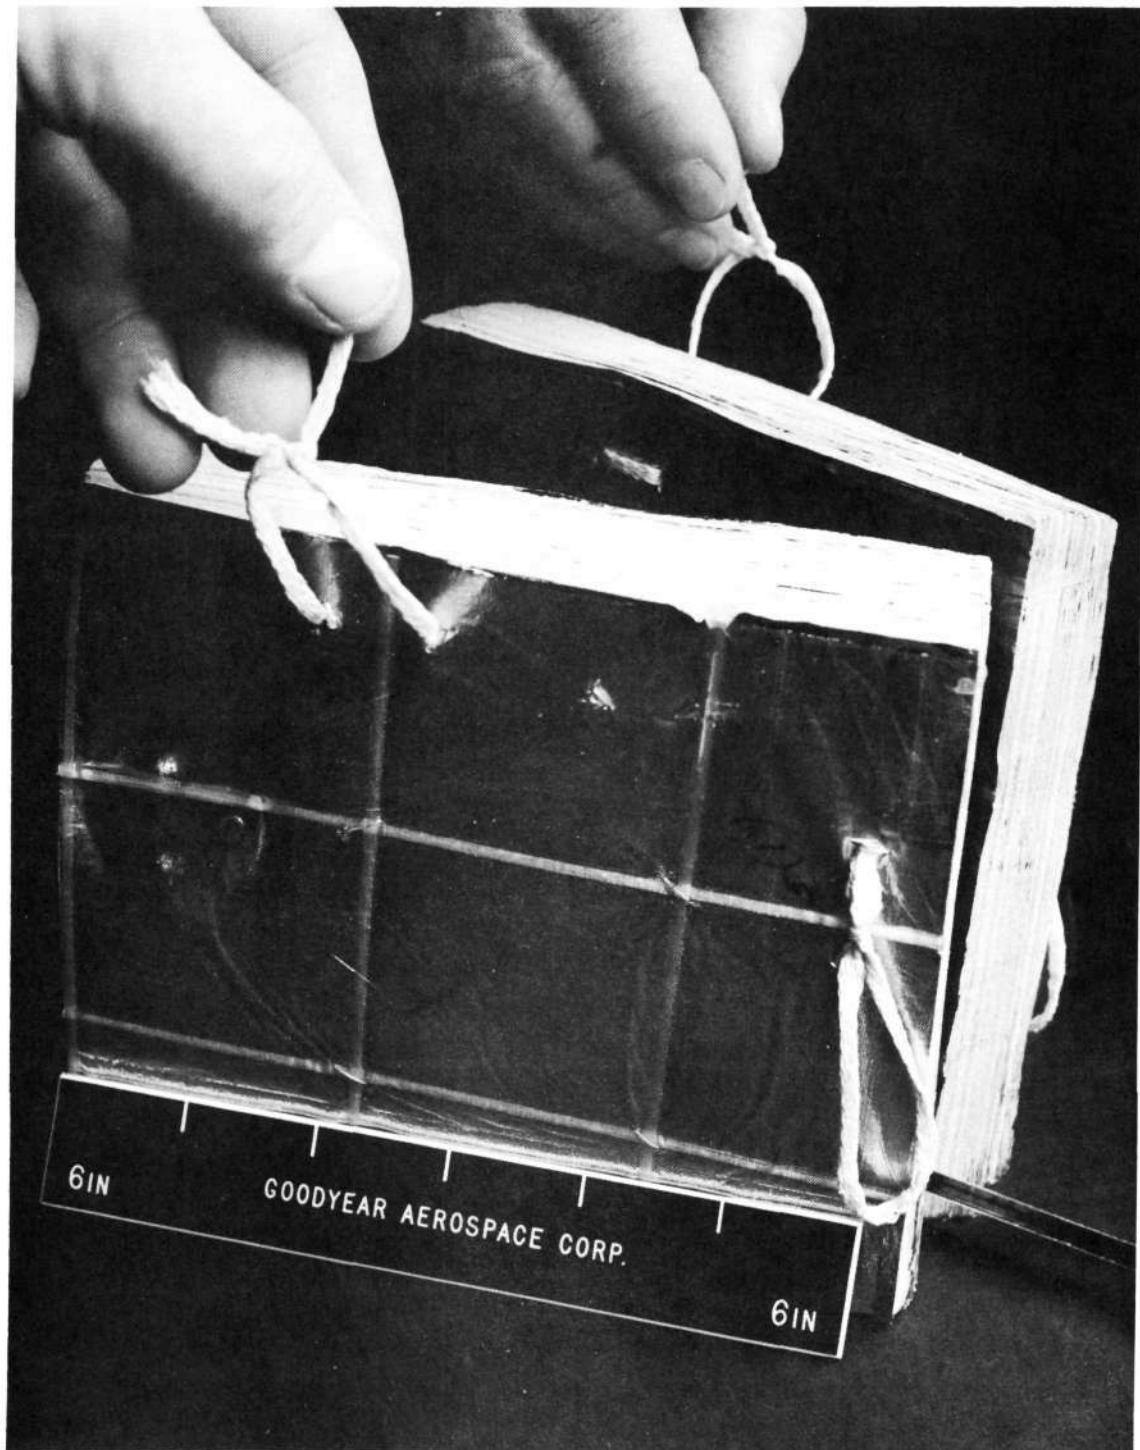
GAC-9 insulation sample with loops of tufting braid installed during demonstration of Model LT 280 Tufting Machine.
